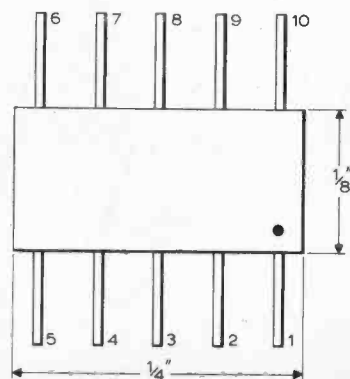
(right): Physical dimensions and outline of the i.c.—top view of the unit. Lead 1 is identified by the spot of paint adjacent to it.
